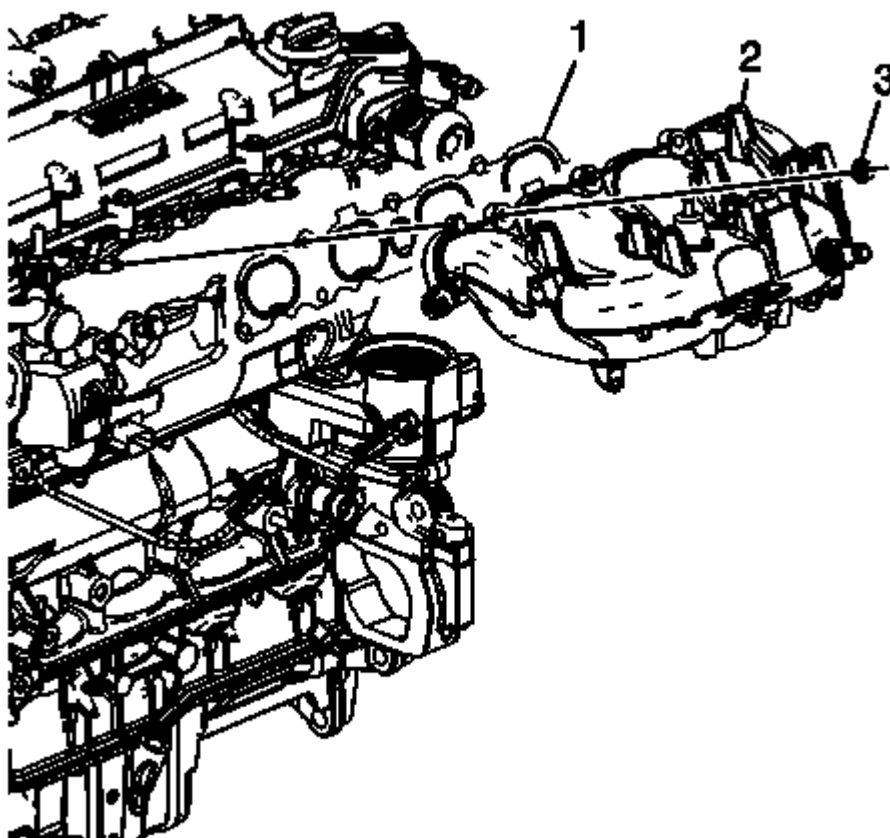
Intake Manifold, Intake Manifold Bolts And Intake Manifold Gasket
